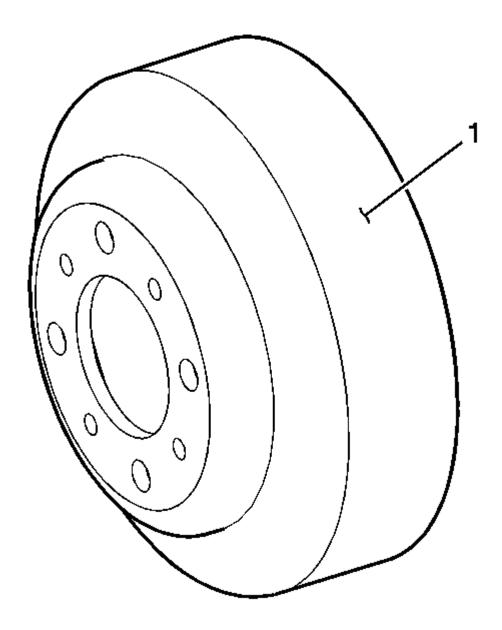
Inspecting Water Pump Pulley Courtesy of GENERAL MOTORS CORP.
